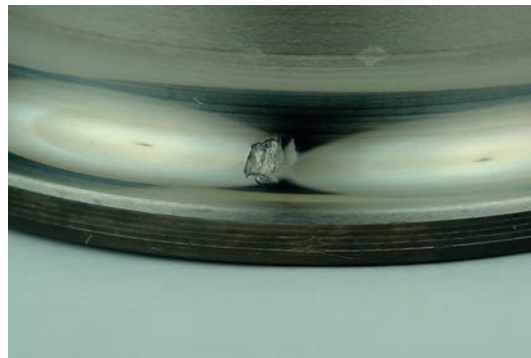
Initial subsurface spalling in a deep groove ball bearing — Rotating inner ring
